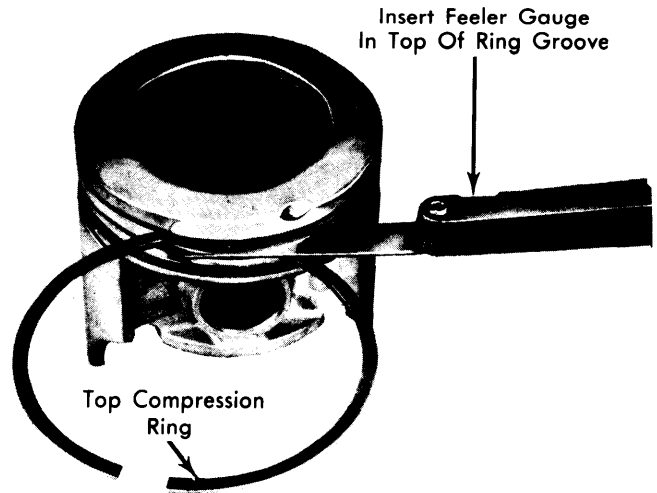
Using Feeler Gauge to Check Ring Side Clearance
